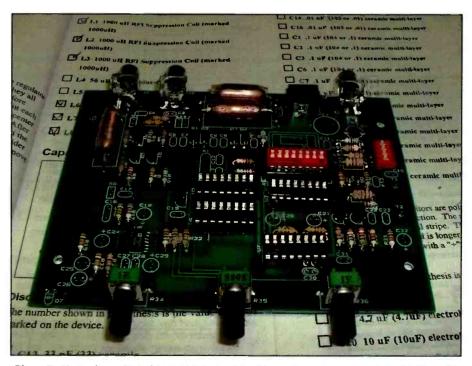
Photo D. Here, the pc board assembly is nearing 50 percent completion. Note that the component body outlines and parts legends are silkscreened onto the board. The assembly manual, in the background, allows each step to be checked off at completion. The larger IC DIP packages use sockets.
